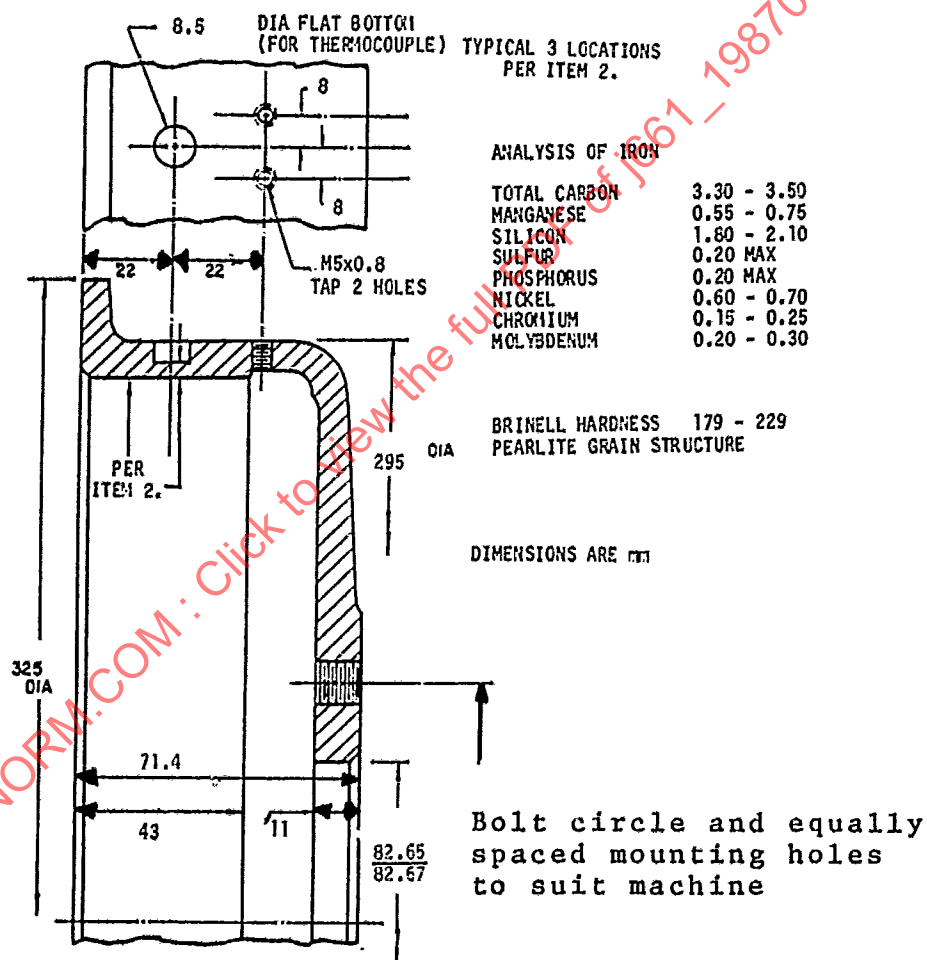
FRICTION MATERIALS TEST MACHINE DRUM
